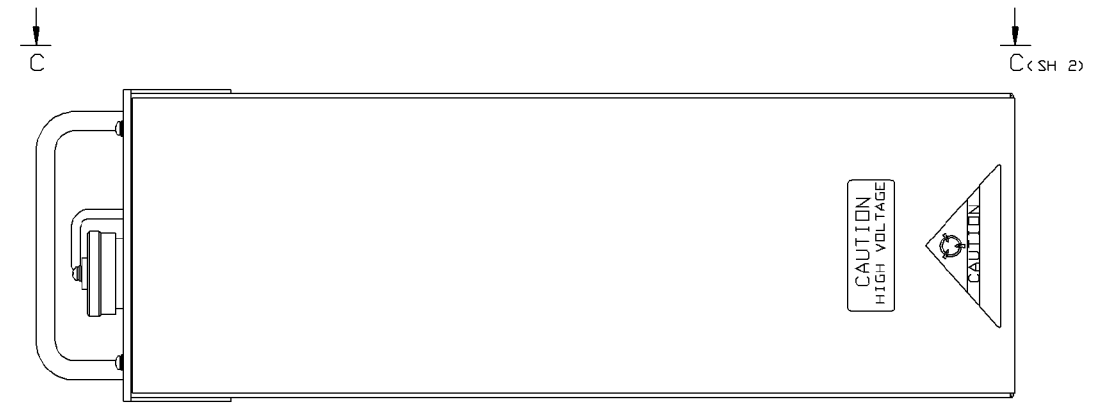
(Sheet 4). TT-950/952 T²CAS Computer Unit Outline and Installation Drawing
